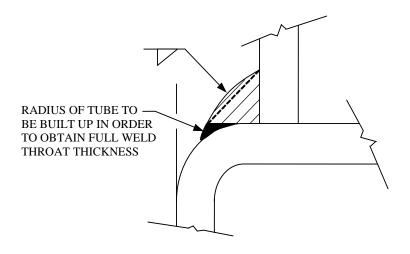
BUILD UP RADIUS WELD
